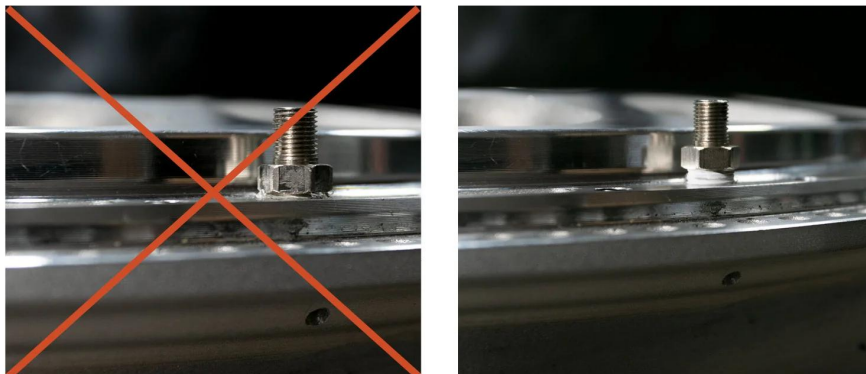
Valve on left has been threaded to the hex flange which is incorrect and may cause leaking. Valve on the right has been properly installed.
